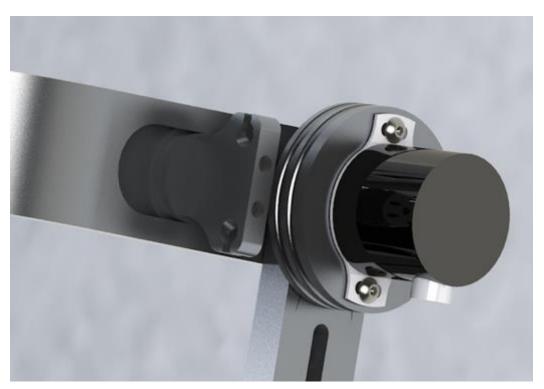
Adjustable hip joint with angle encoder attached to pulley.
